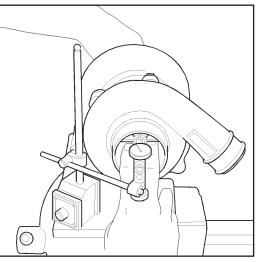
Measuring compressor wheel radial clearance with deflection gauge 8222 and measuring stand 8209
